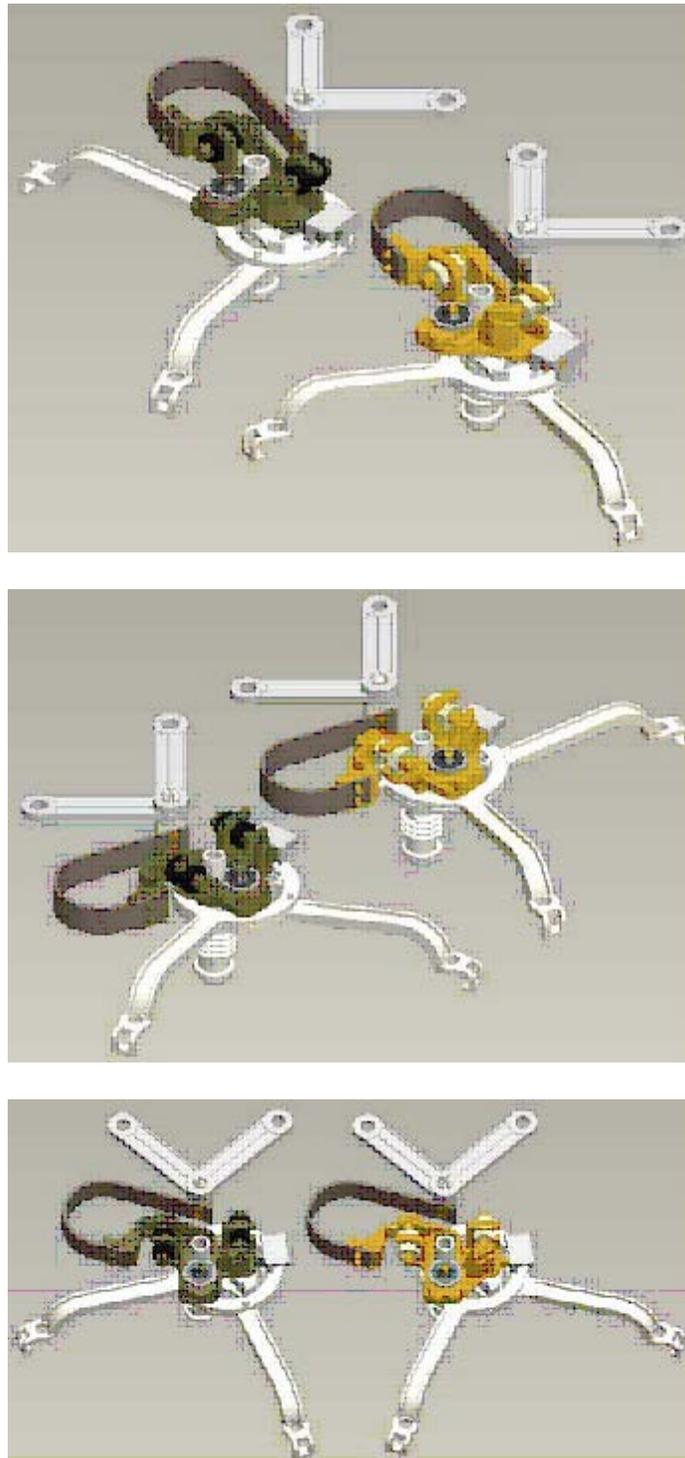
Valve link/Tringle - P/N/Pièce no 091062
